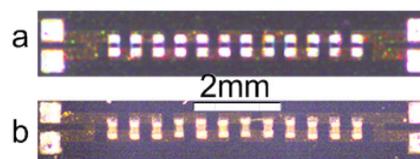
A 10-component series test circuit before (a) and after (b) the assembly of 01005 100 kΩ resistors.
